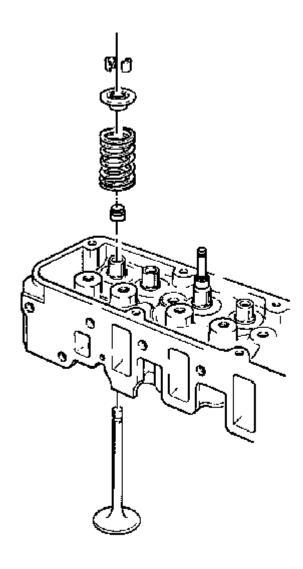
View Of Valve In Cylinder Head Courtesy of GENERAL MOTORS CORP.
